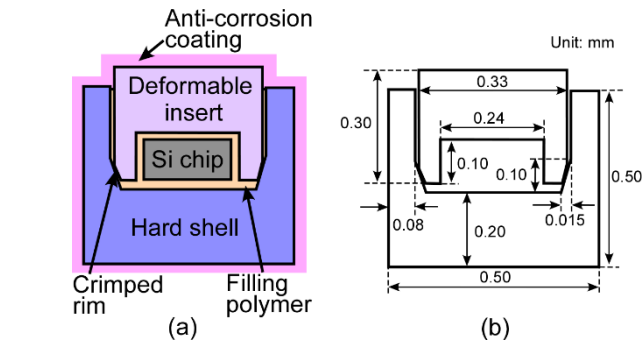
Cross-sectional view of the micropackage: (a) package design; (b) selected dimensions.
